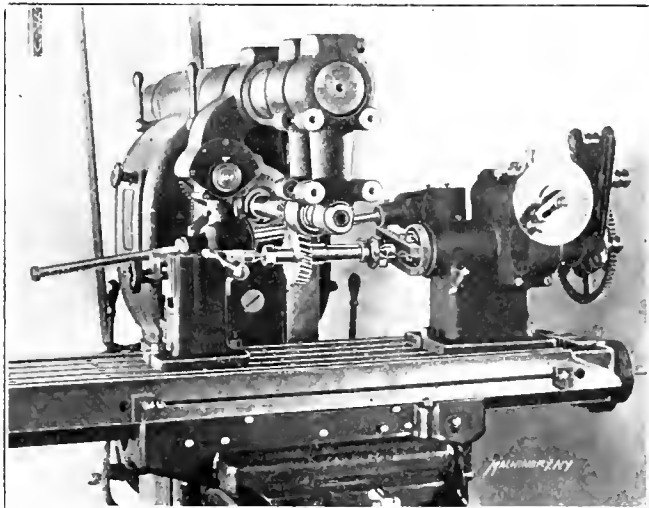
Cutting a Small Worm-wheel with the Change Gearing Directly Connected to the Work Spindle.
